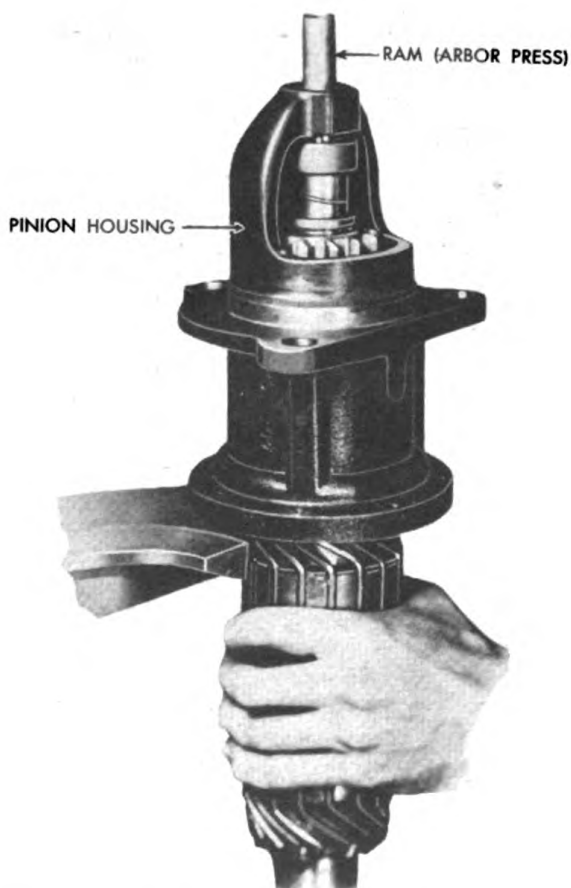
Pressing Armature Shaft out of Pinion Housing.
